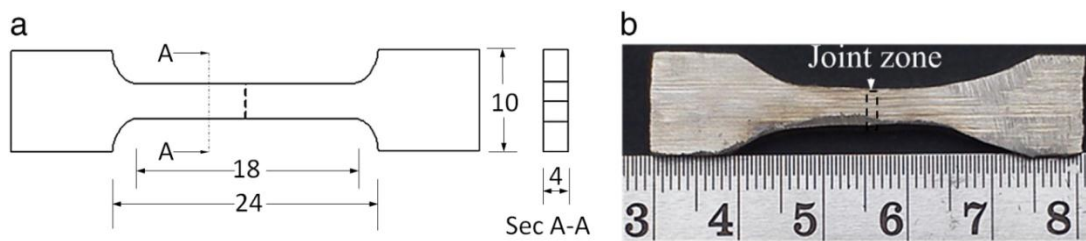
(a) Dimensions of tensile test specimen as per ASTM-E8 standard and (b) Photograph of microwave welded SS-316 tensile test specimen (Bansal et al., 2014).
